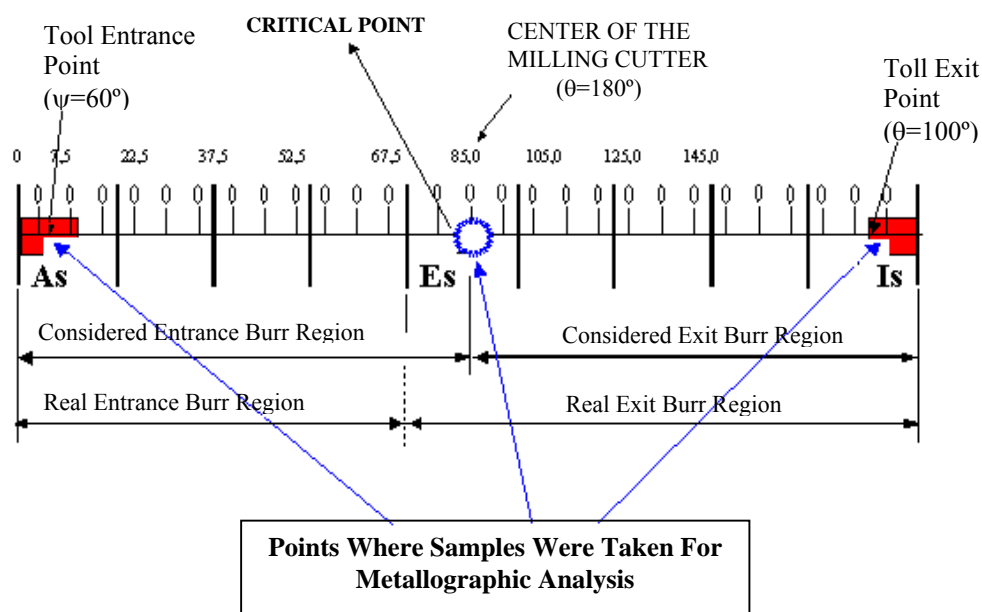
Identification of the three positions at the exit face edge of the engine block after machining where the samples were taken out for measuring the burr dimensions
